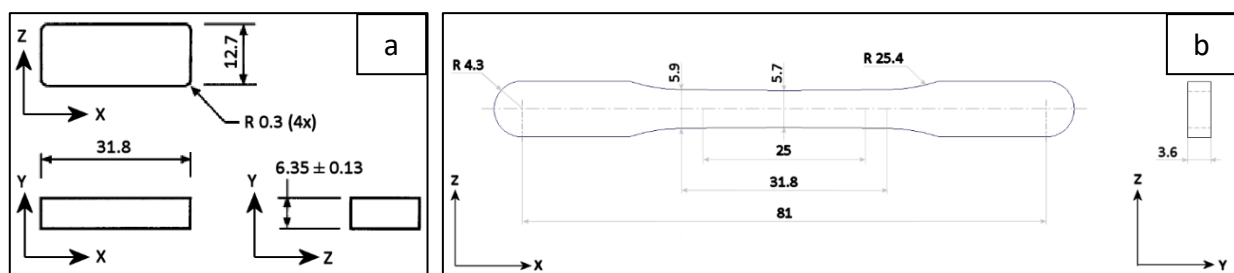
Geometry of samples produced for mechanical tests: a) flexural (FLEX), b) tensile (TENS_0). Dimensions in mm.
